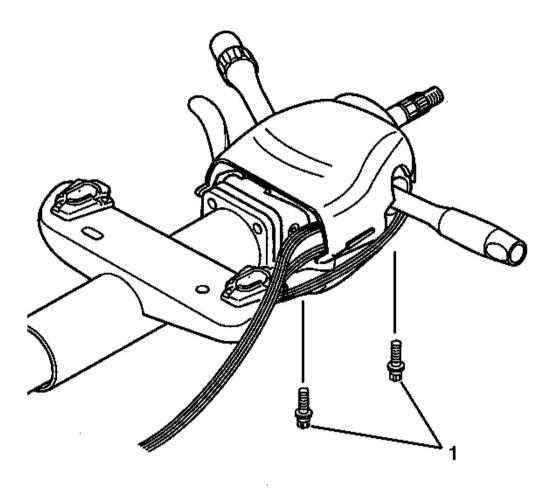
TORX(R) Head Screws & Lower Trim Cover Courtesy of GENERAL MOTORS CORP.
